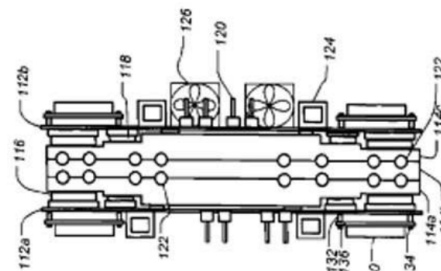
Google patent drawing shows a cross-section of a design for a liquid-cooled server assembly featuring a heat sink with motherboards on either side.
